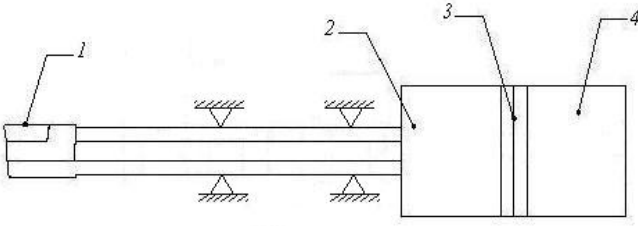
Numerical scheme of cutting tool: 1 – insert; 2 – cutting tool (horn); 3 – piezoceramic rings; 4 – backing
